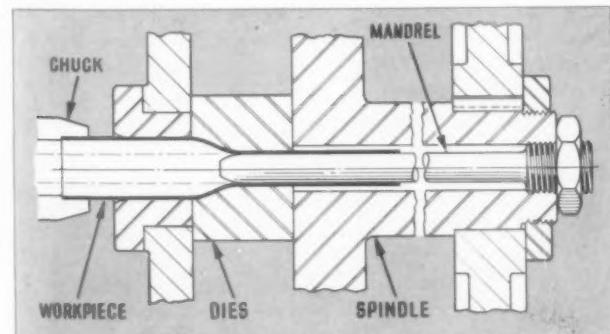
Section through spindle, showing reduction of tube and bottle shape. Note mandrel for controlling I.D.
